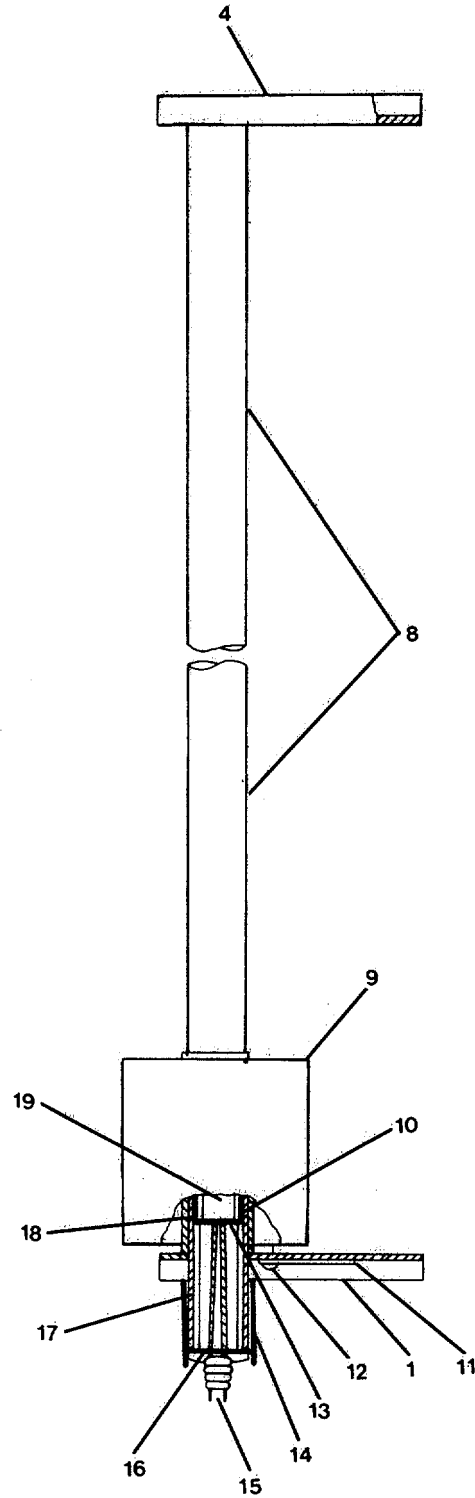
Float Switch (Transmitter Assembly) (Sheet 2 of 2).
